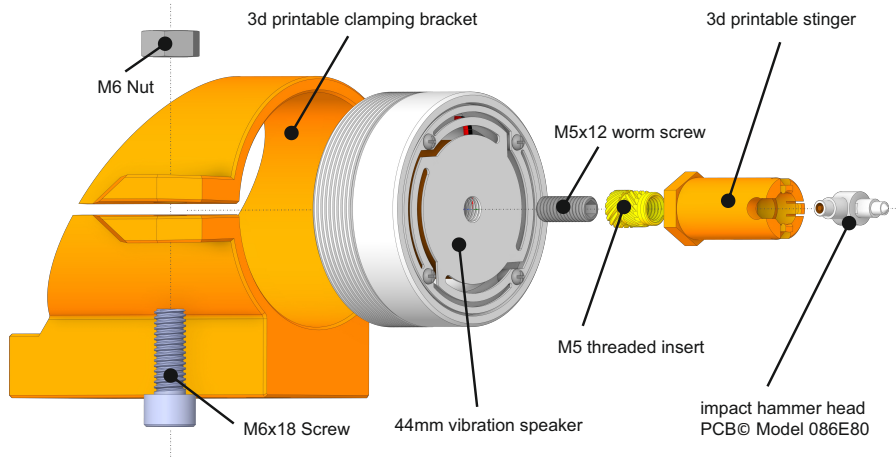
exploded view of the components using the 44 mm vibration speaker [17].
